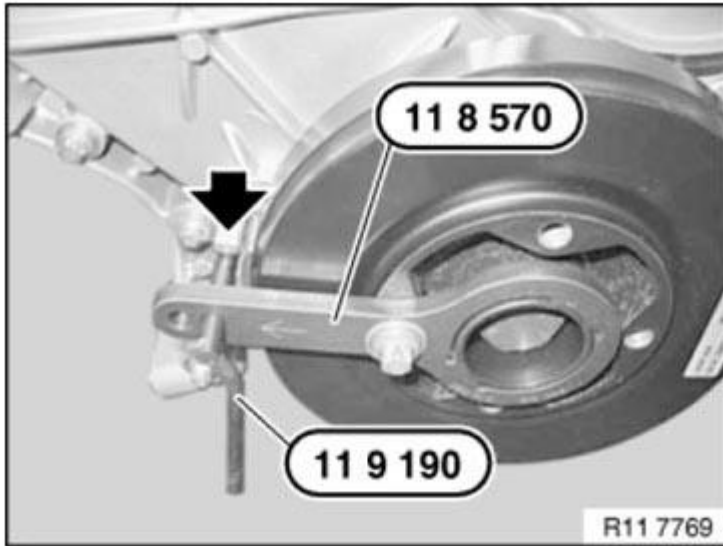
Securing Vibration Damper With Special Tool 11 9 190
